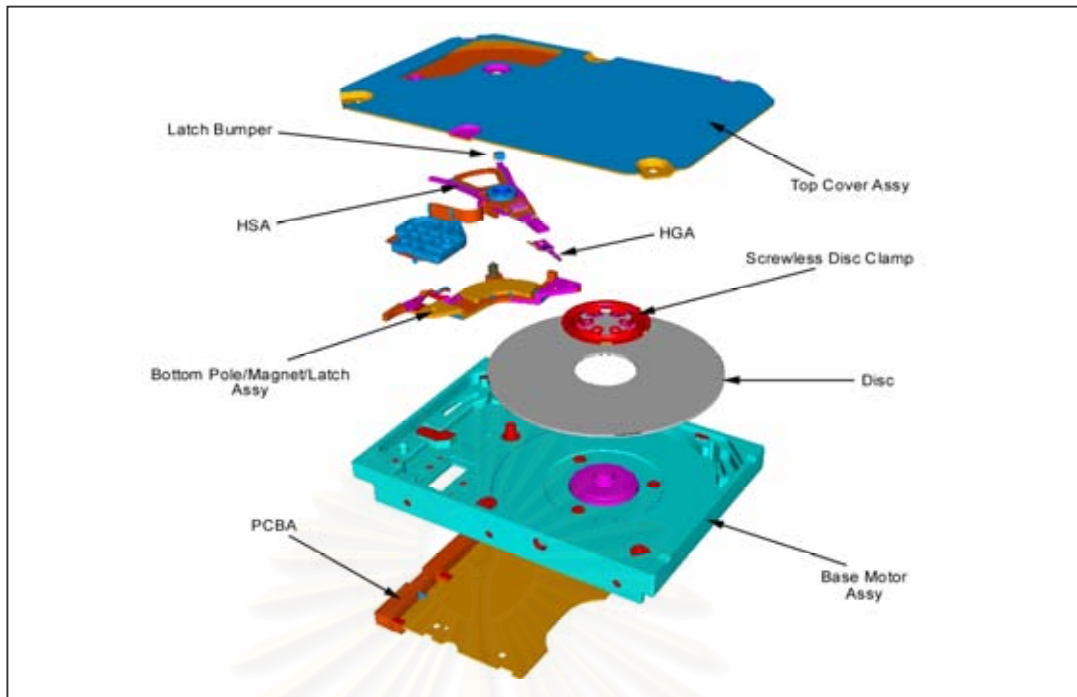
Component of Hard Drive (from Seagate engineering department)
